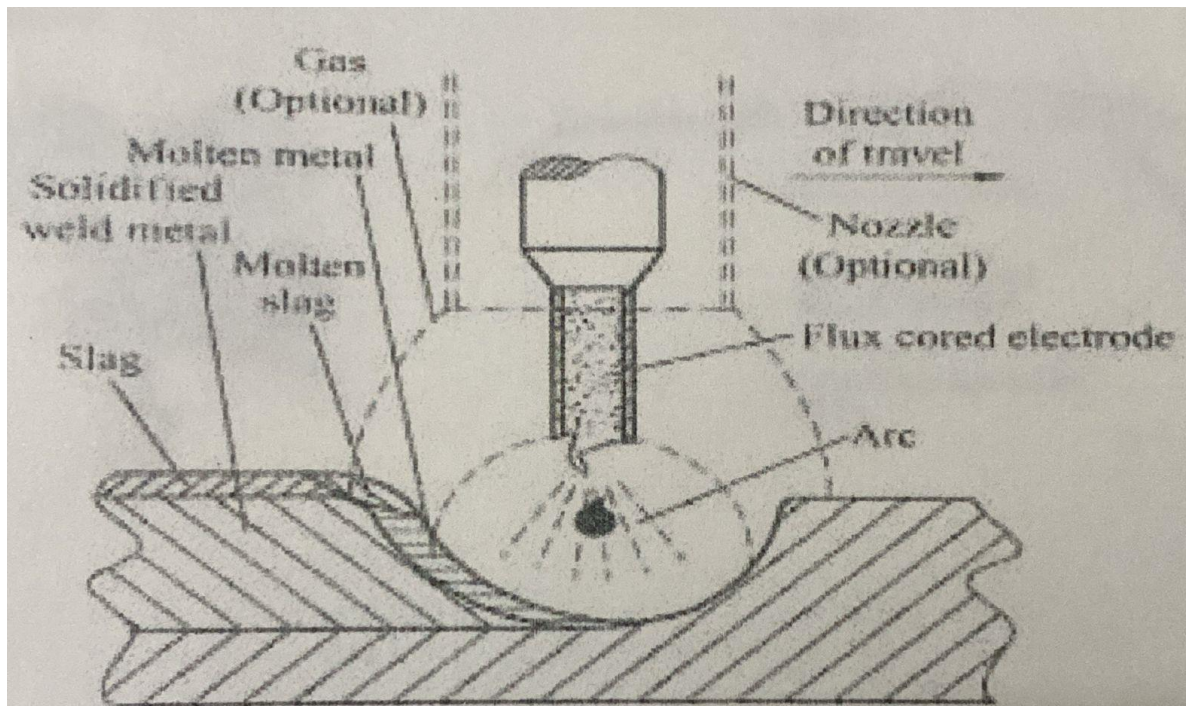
Flux Cored Arc Welding (FCAW)
